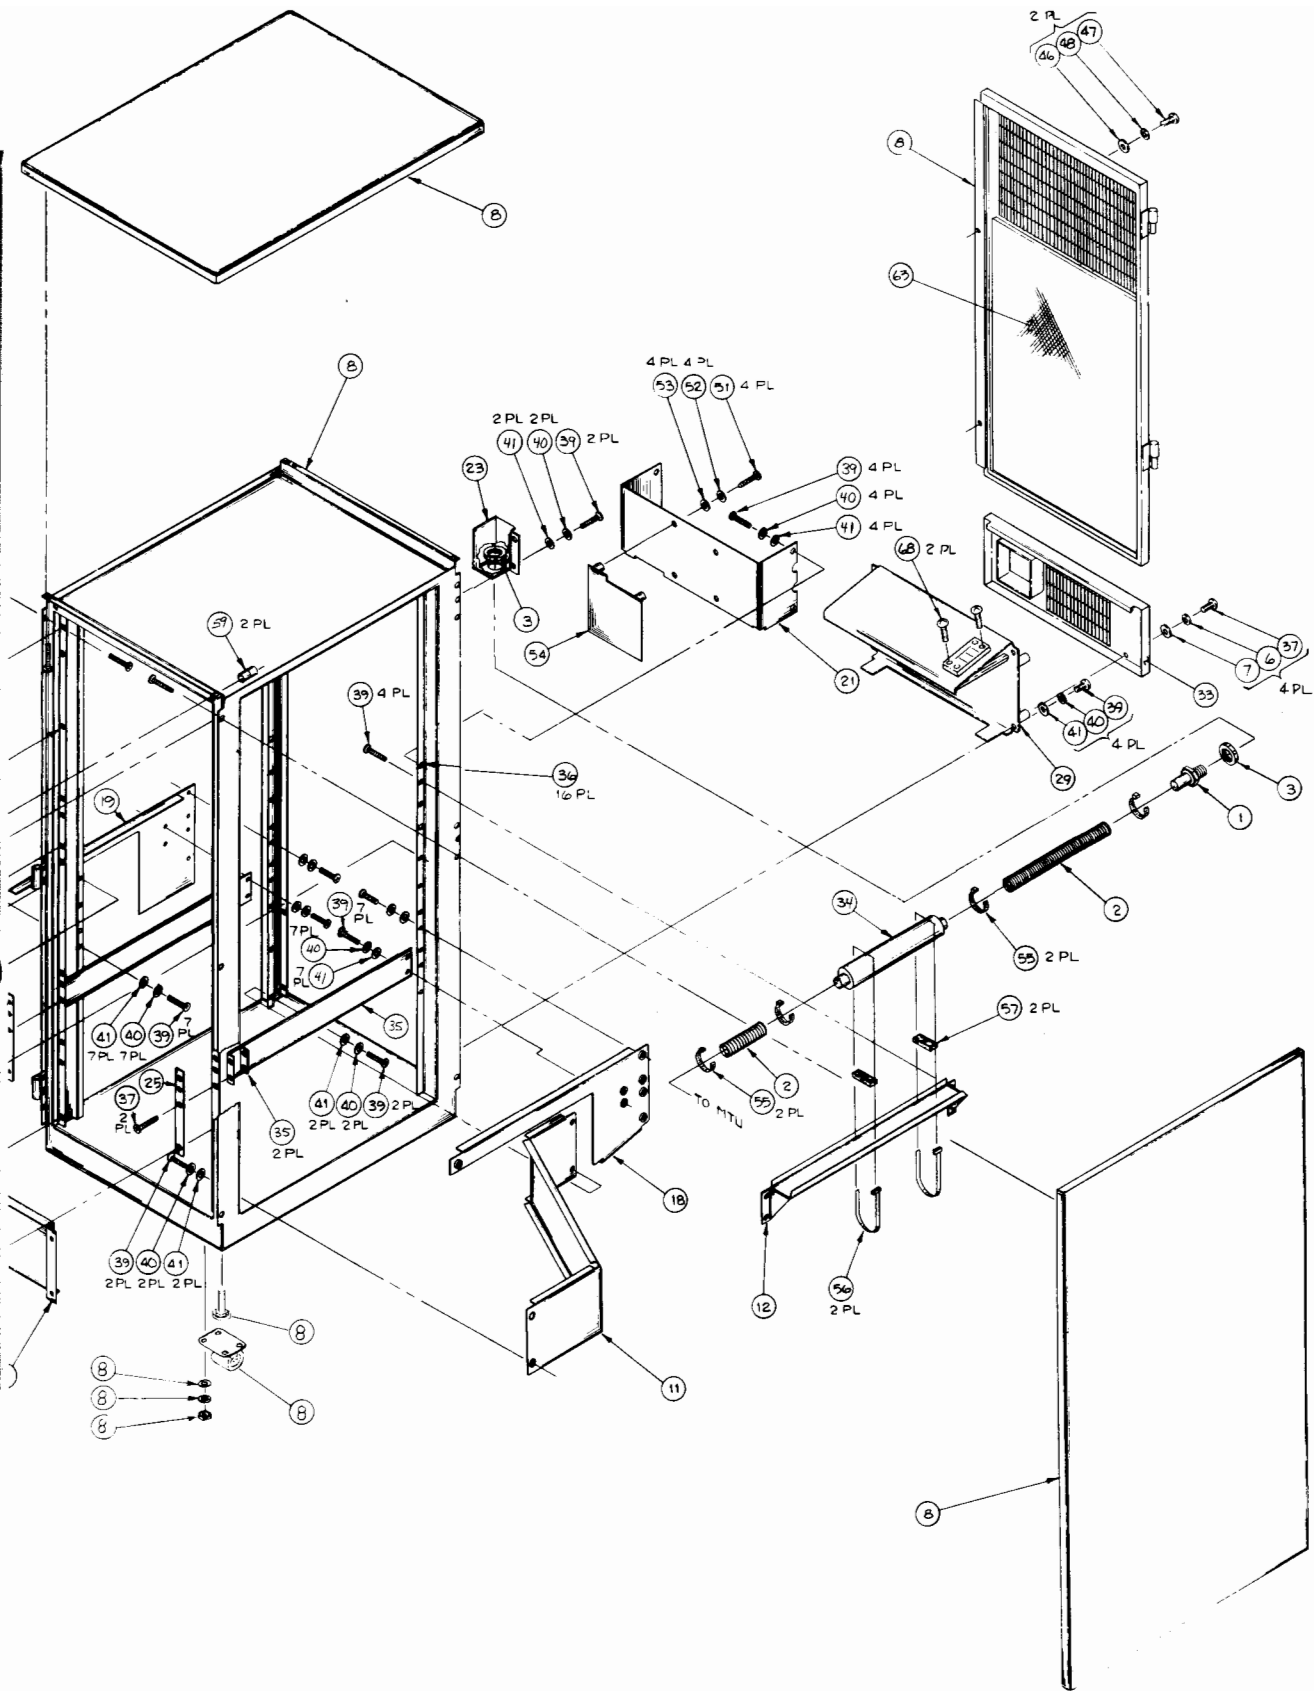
HP 7976A Top Level Assembly, Exploded View
